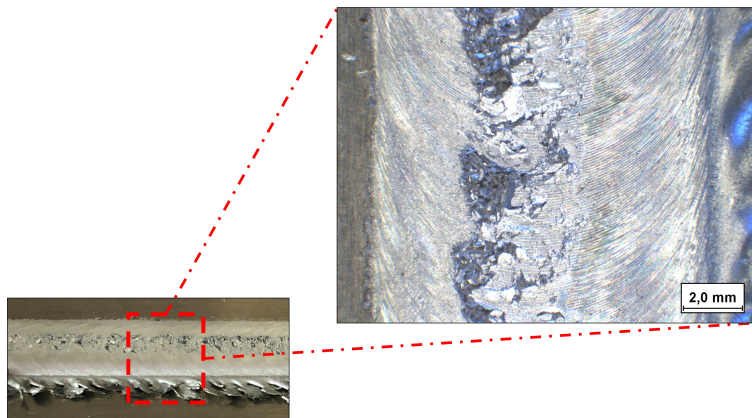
External defects welding AA7075-T6 at 2000 rpm.
